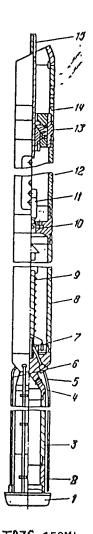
The TBZS-152Mtype filled borehole thermodrilling tool layout:
